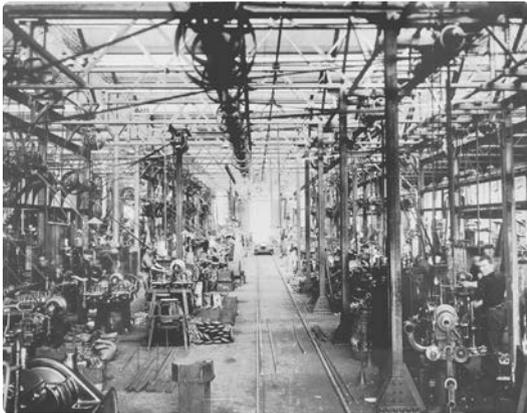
The Machine Shop was a cluttered workplace with the machine tools lined up either side of a trolley track used to deliver and collect the items that needed machining. The line shafting and drive belts added to the general clutter. Image courtesy Whitehead Studios.
